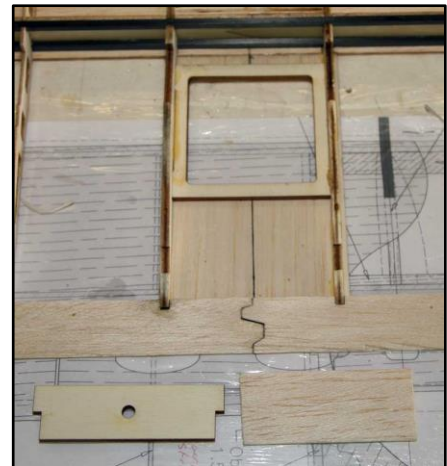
Wing Hold-Down Parts w/o Spoiler Box
